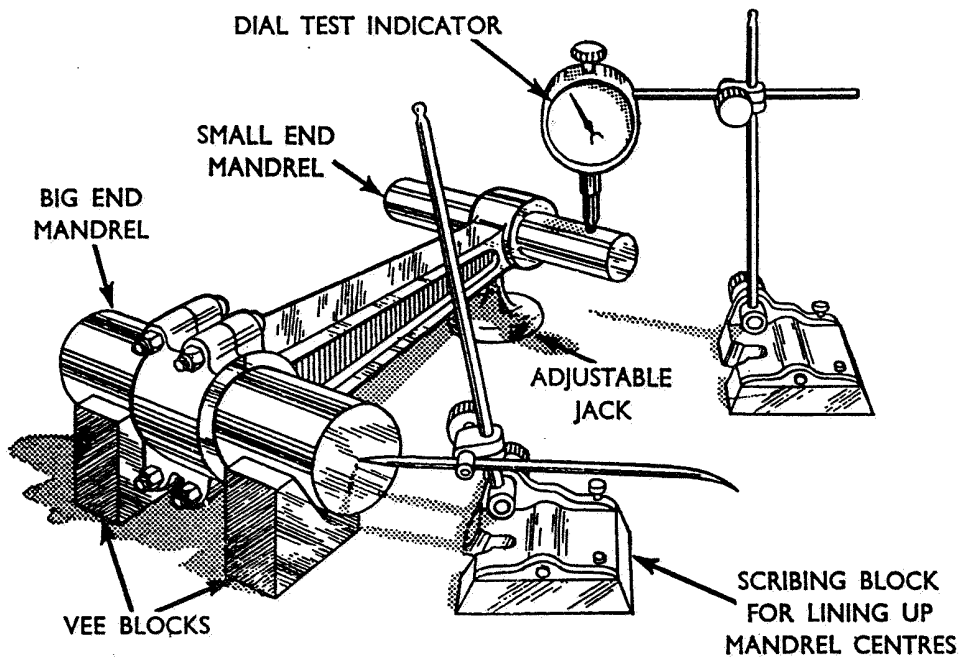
CHECKING A CONNECTING ROD FOR TWIST
